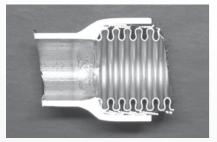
Welded connection of HYDRA hose assemblies
